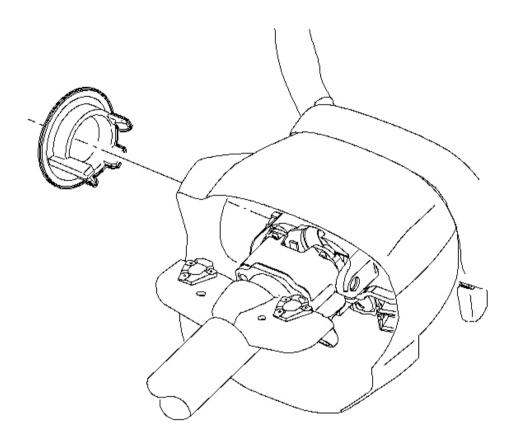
Ignition Switch Bezel Courtesy of GENERAL MOTORS CORP.
